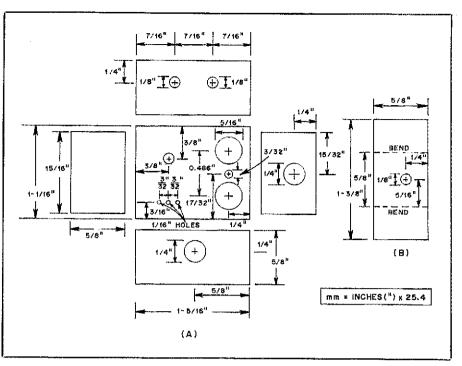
The five pieces of circuit-board material used to form the box are cut and drilled as shown in A before the box is assembled. The heat sink, B, is made from 1/16-inch aluminum or brass.
